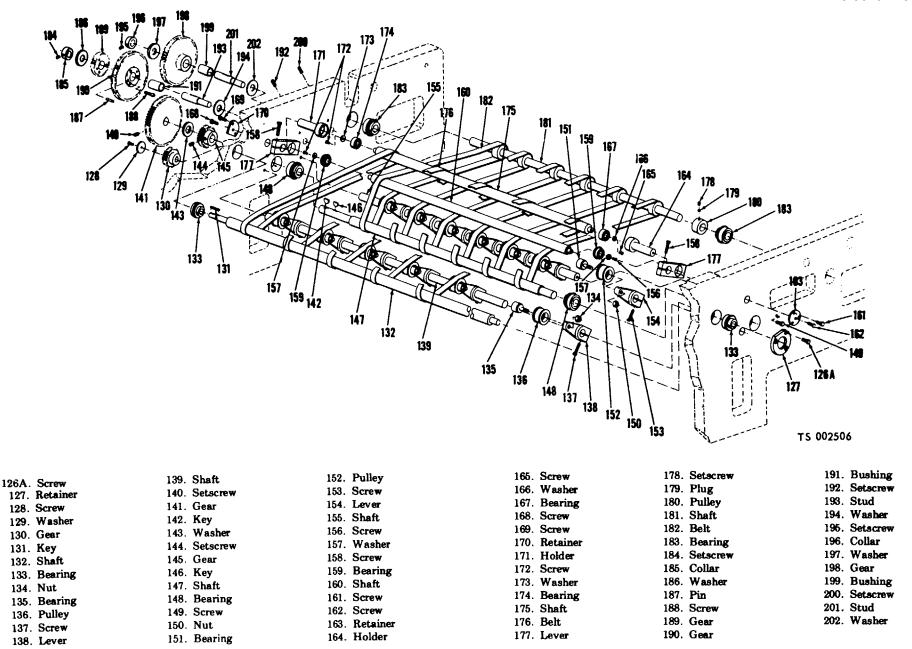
Slowdown sheeter alignment assembly (Sheet 3 of 7). 4-107
